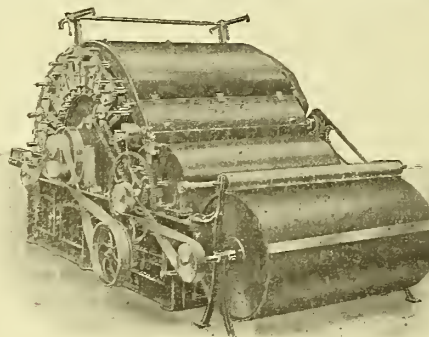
ROLLER AND CLEARER CARDING-ENGINE WITH FLEECE-DRUM.
